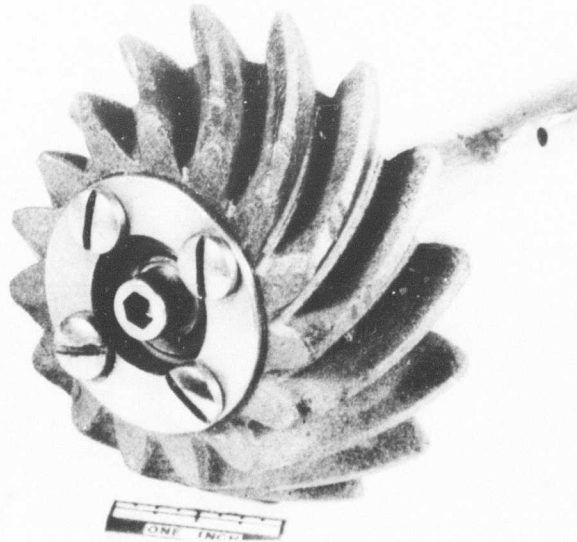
Polyimide Idler Gear Assembly Before Coating, Series 5.
